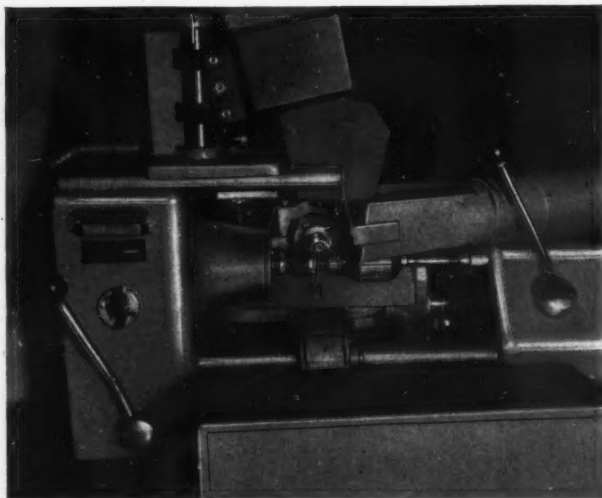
E.M.I. electronically controlled machines, of the design here shown, are employed for undercutting universal motor commutators automatically
